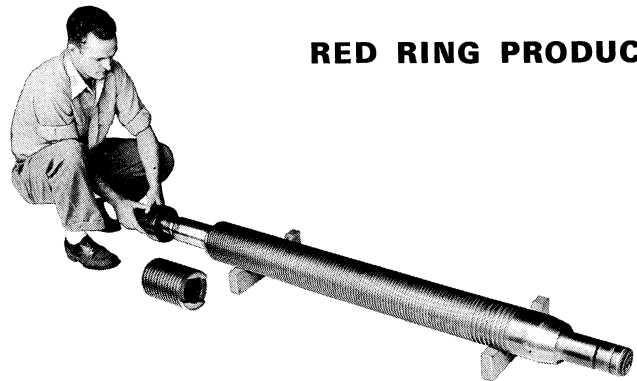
A Red Ring full-form finishing broach with the shell-type finishing section removed.
